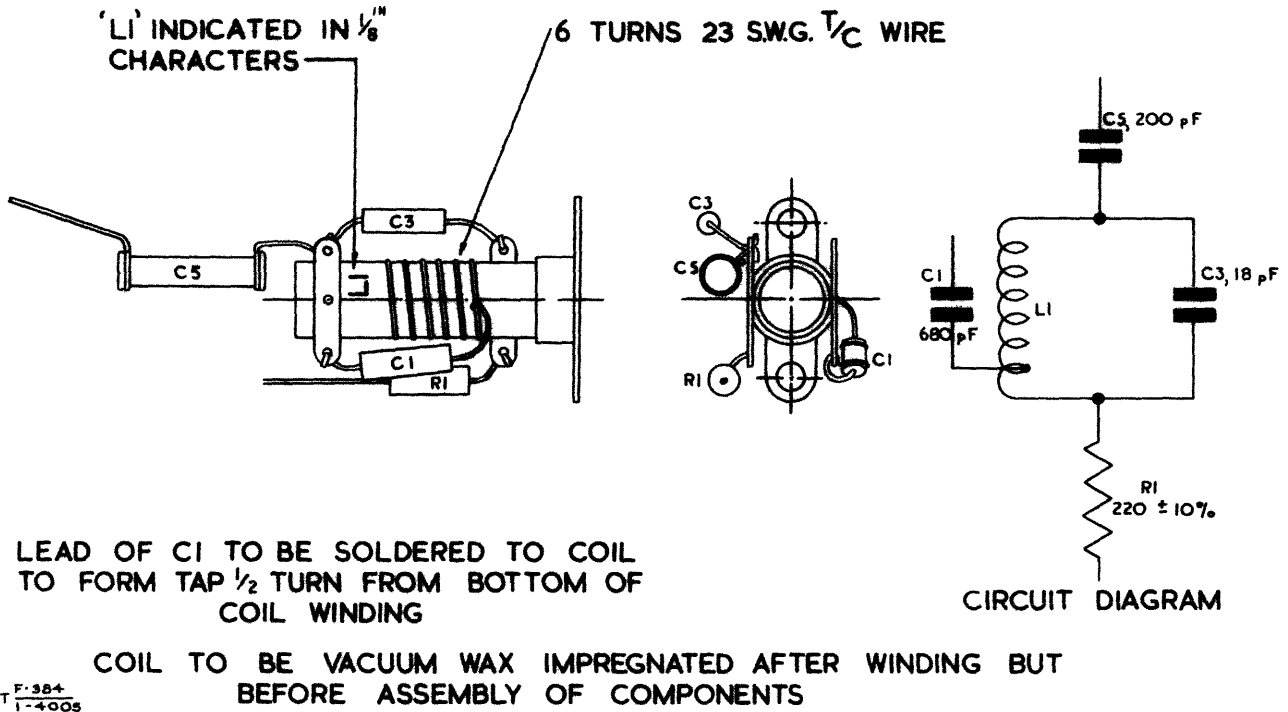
Assembly and circuit diagram of coil L1 and components
